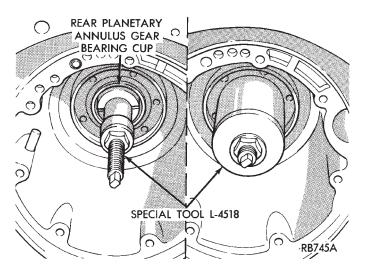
Remove Rear Planetary Annulus Gear Bearing Cup
